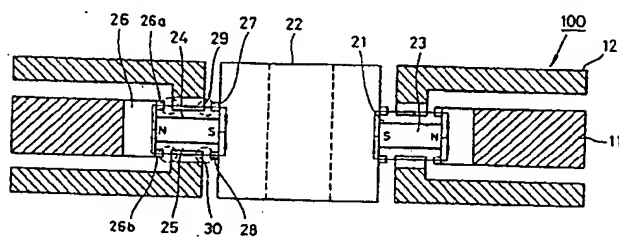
to Fig. 6 relate to one actual example of this invention, Fig. 1 is sectional view of optical disk media device of this invention, Fig. 2 is sectional view showing a part of Fig. 1 by enlarging it, Fig. 3 is partial oblique view of this invented device, Fig. 4 is sectional view of window members shown in Fig. 3, Fig. 5 is top view of window members, Fig. 6 is
